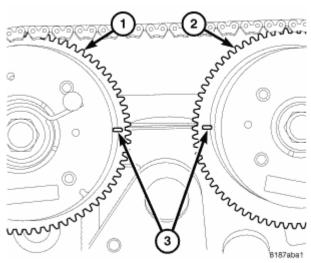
CAMSHAFT TIMING Courtesy of CHRYSLER LLC
